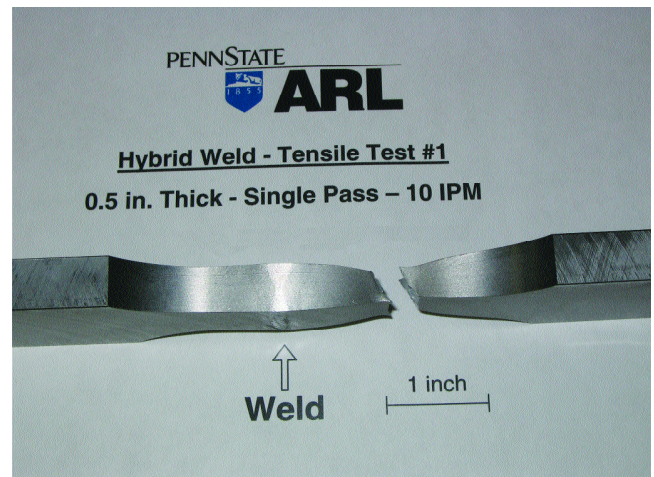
Mechanical testing of hybrid weld in 0.5-in.-thick mild steel indicated adequate mechanical properties.
